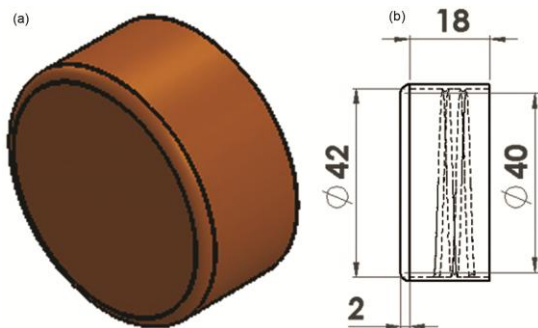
CAD of the cap (a) side view, and (b) isometric view of cap
